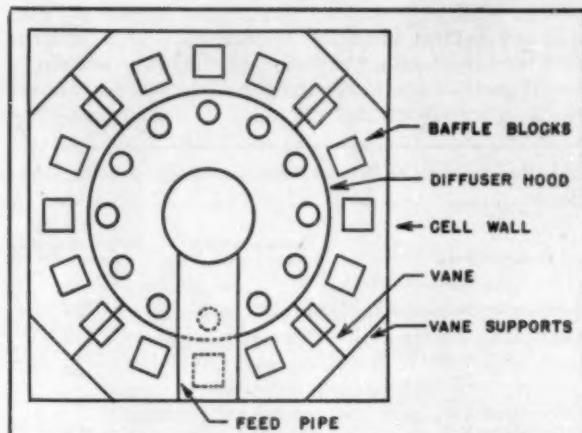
Line drawing of cell bottom showing position of baffle blocks.
